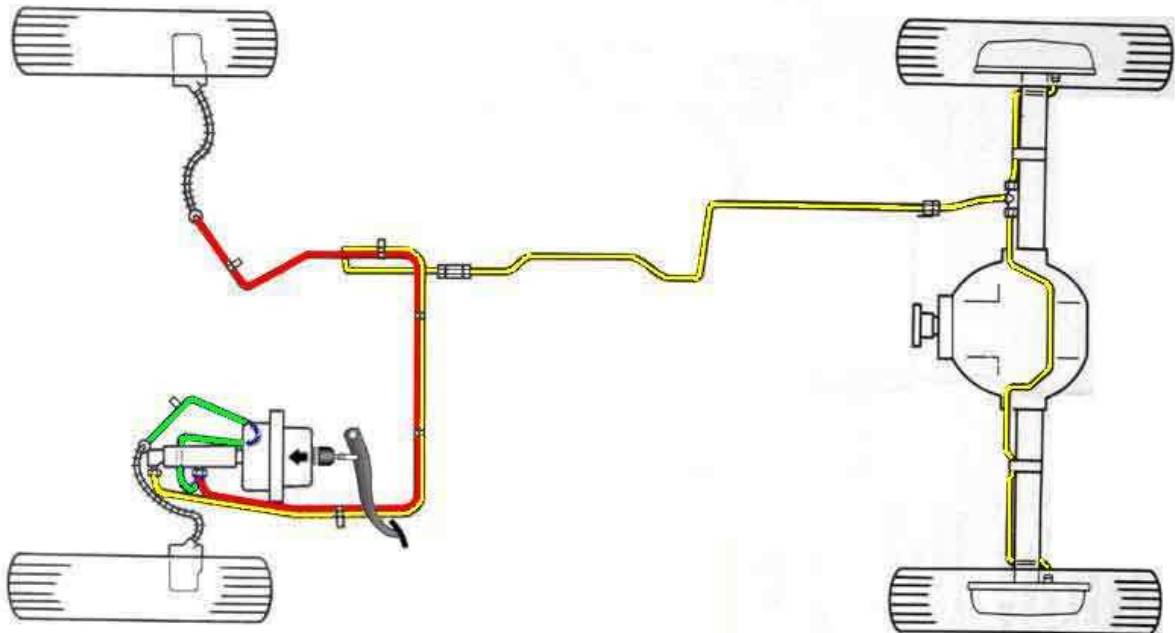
Hydraulic brake layout, later type (RH drive) with tandem master cylinder and servo (Sec 1)
